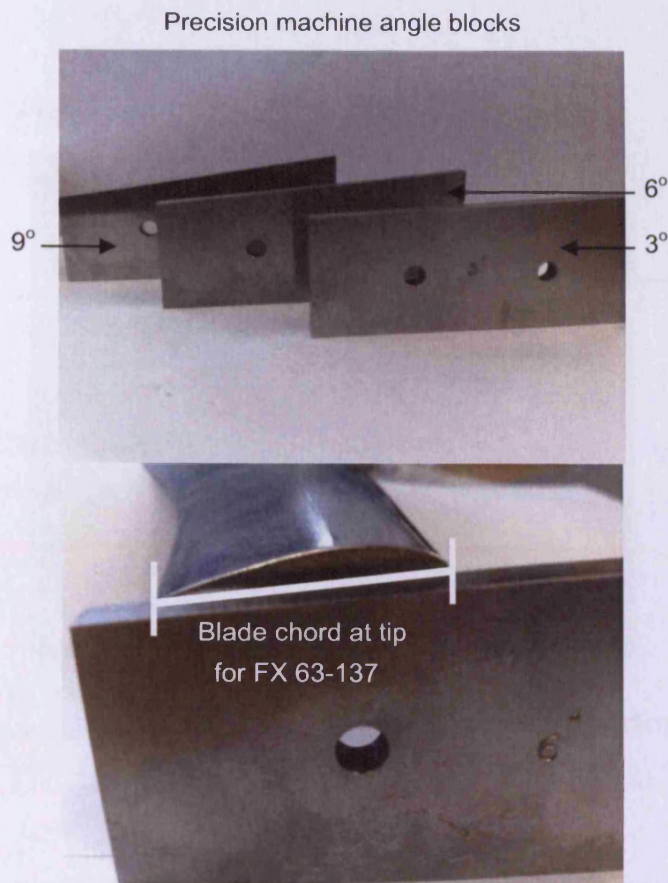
Angled precision blocks with 6° block aligned with blade tip on surface table
